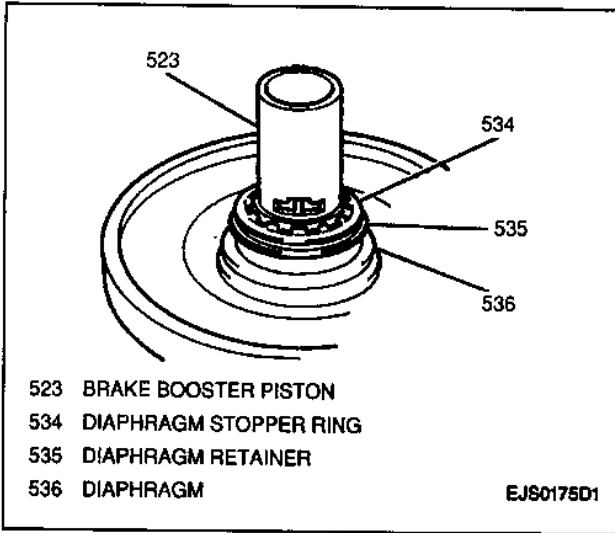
Proper Diaphragm Retainer and Stopper Ring Installation
